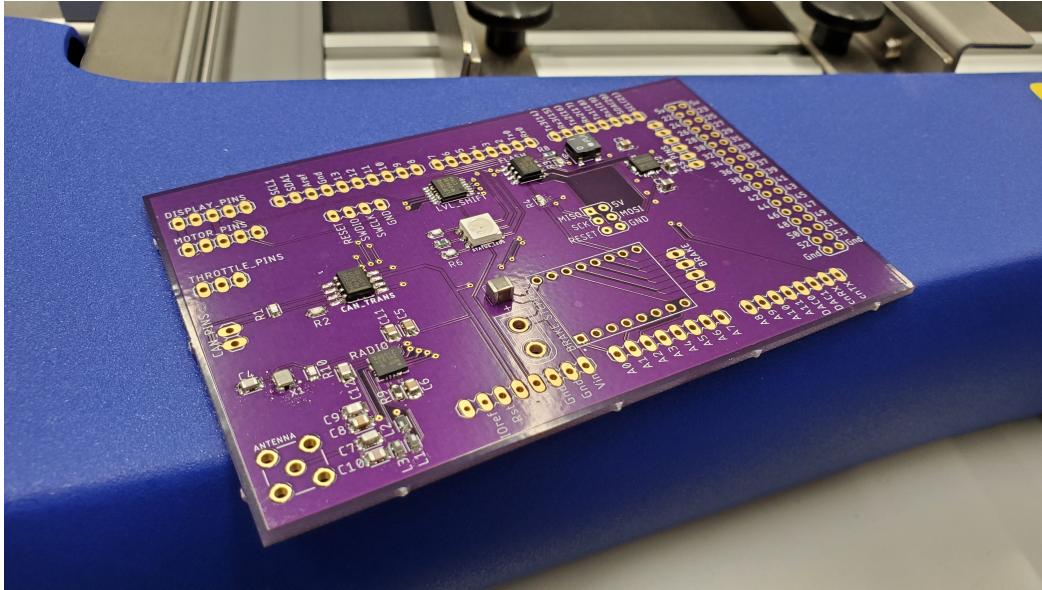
The final control and sensing unit PCB shield, with soldered surface mount components.
